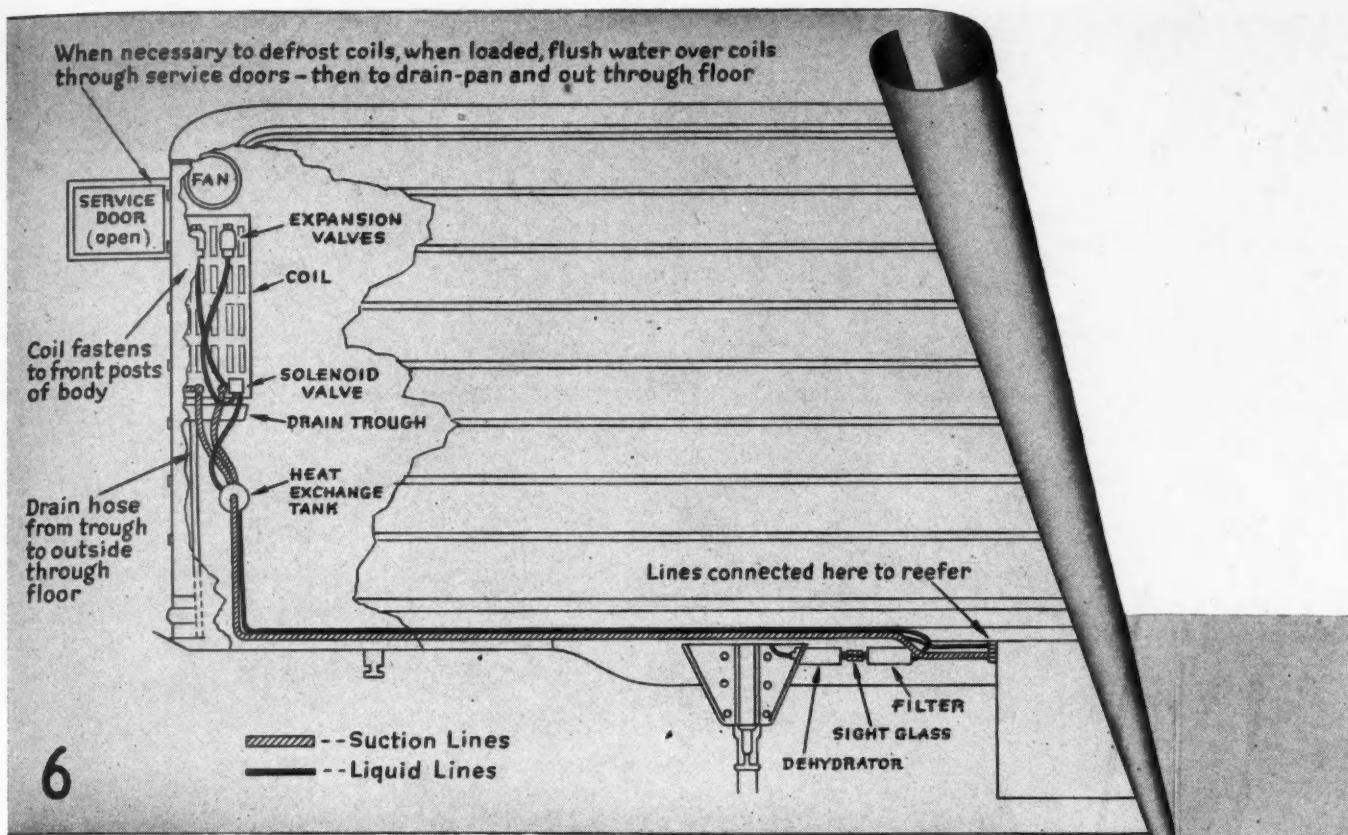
, upper left. Inside front of trailer with shield removed to show evaporator coil and defrosting arrangement. Fig. 6, above. Cut-away view of trailer showing suction and liquid lines, service door, coil and fan
